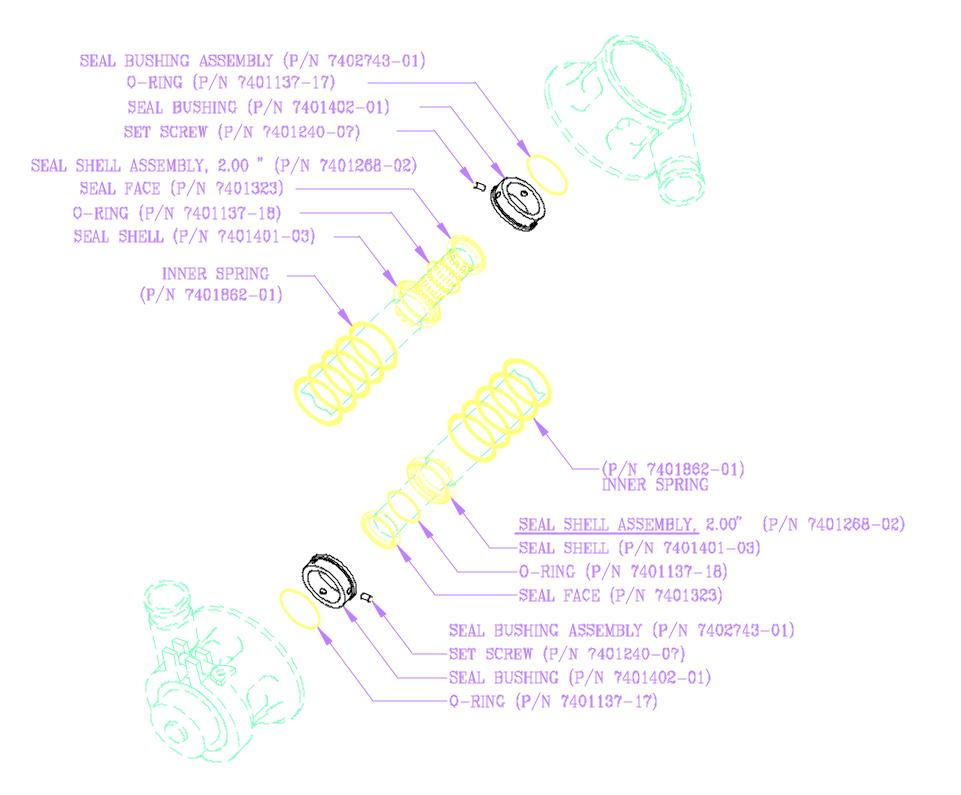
Standard And Hard Face Seal Assemblies, Tangential Heads Backside of Figure 7-2 -- 11 x 17 foldout drawing
